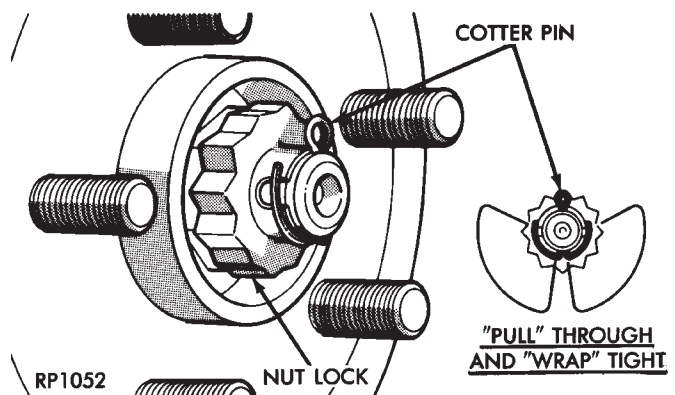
Installing Spring Washer, Nut Lock And Cotter Pin
